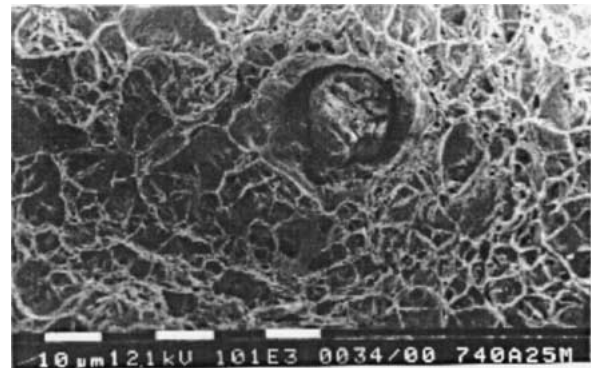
Fracture surface of specimen with ductile dimples and big inclusions in 740A25.
